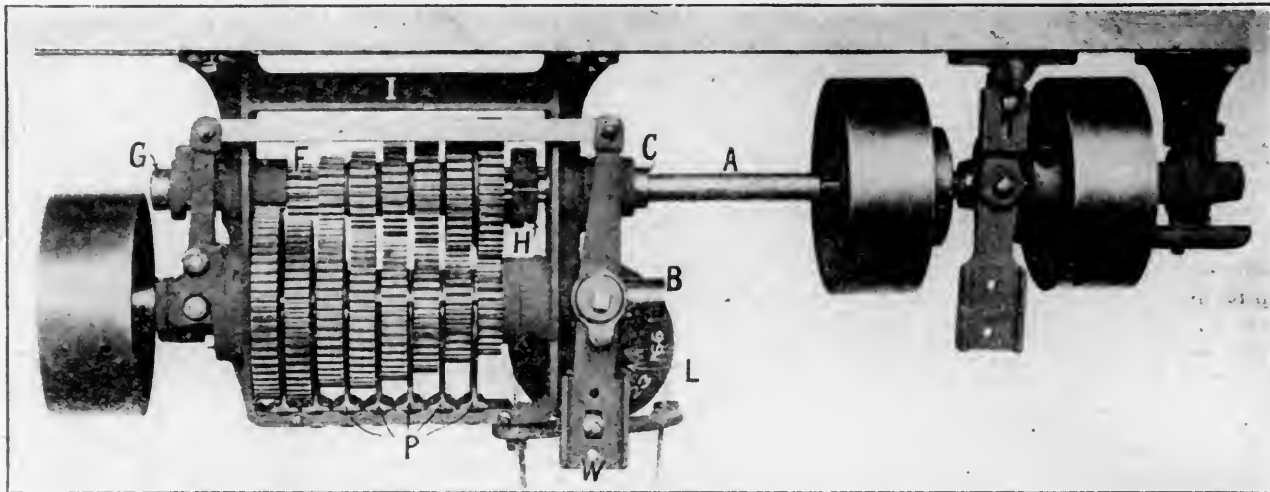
FRONT VIEW WITH COVERS REMOVED, SHOWING SHIPPER LEVER AND CONNECTING ROD TO SLOW-SPEED CLUTCH.
